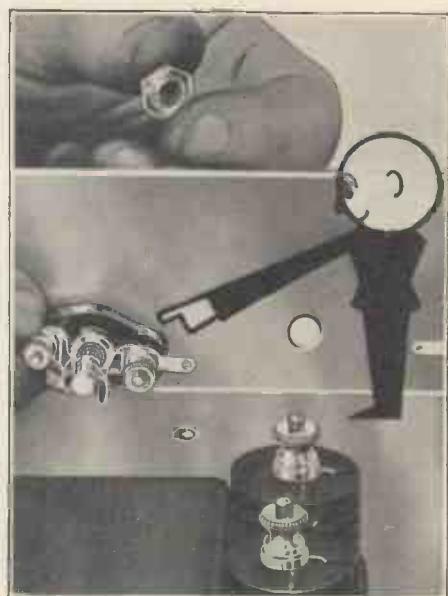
In fixing the switches the metal washers may be omitted. Screw the nuts tightly on to the fixing bushes, so that they make proper electrical contact with the chassis.
